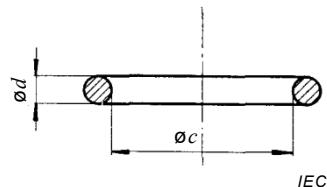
Flange type C: 60154 IEC-PCR 220-500 gasket
